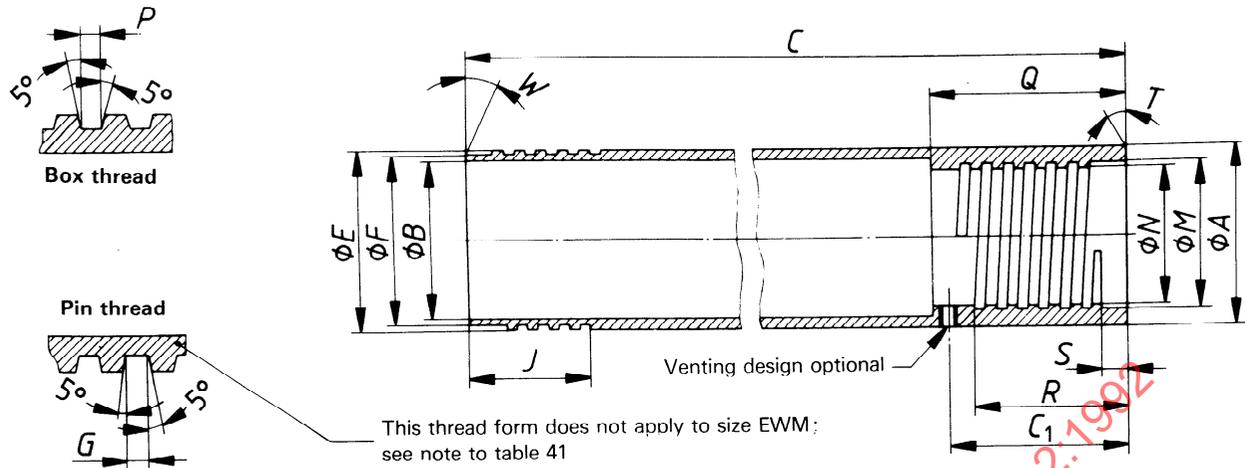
“WM” design double-tube core barrel — Inner tube (see table 41)
